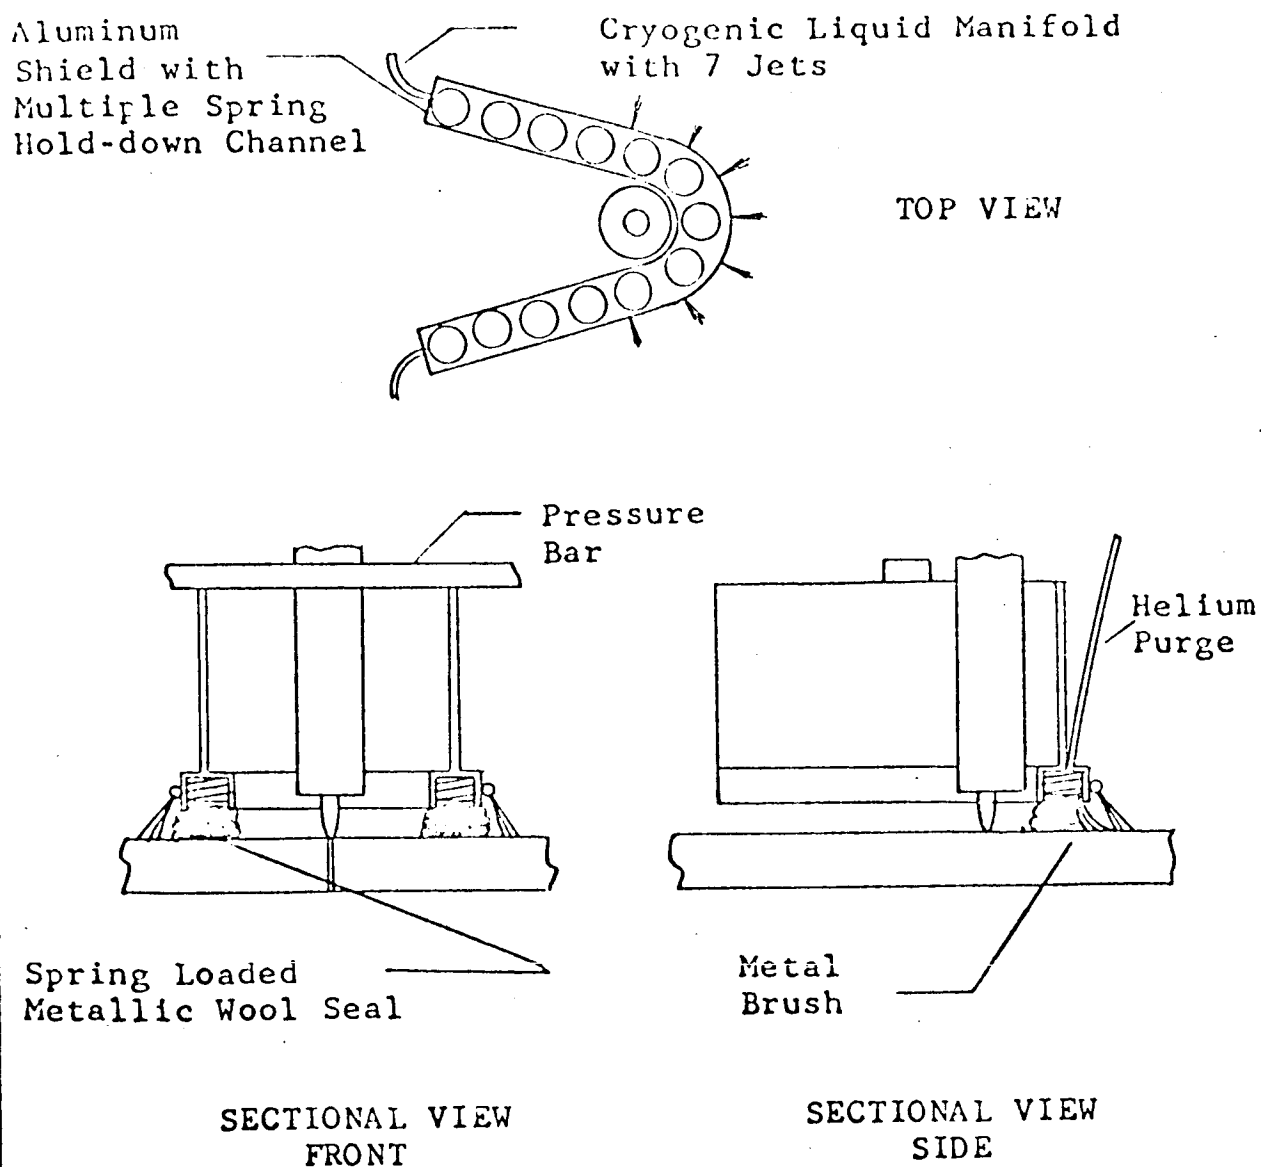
Jet System No. 13 for Front Side Chilling using a Cryogenic Liquid--Traveling Shield with Spring Loaded Metallic Wool and Wire Brush Seal, Helium Purged - 7 Jet Manifold
